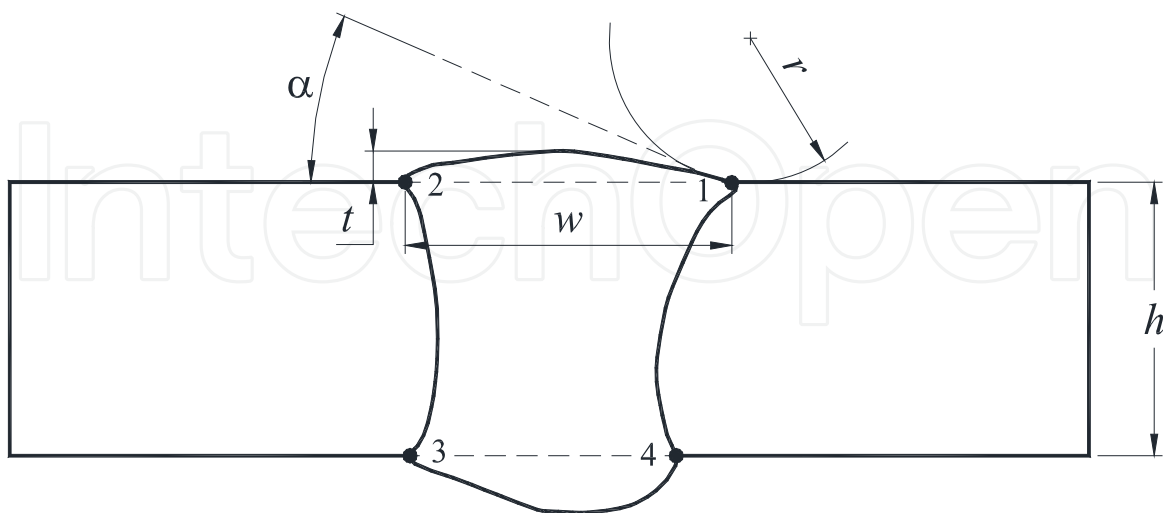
Stress concentration points in MIEA welds and their corresponding dimensions. α =angle formed by the weld reinforcement with plates, r =notched radius, t =height of the weld reinforcement, w =width of the welding profile and h =thickness of the plates.
